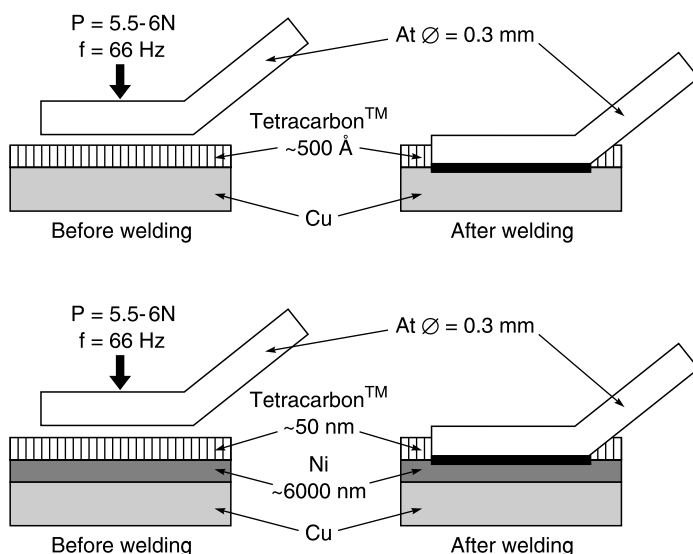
Scheme of cold welding between Al–Cu and Al–Ni metal pairs by means of an interface from a Tetracarbon layer.
